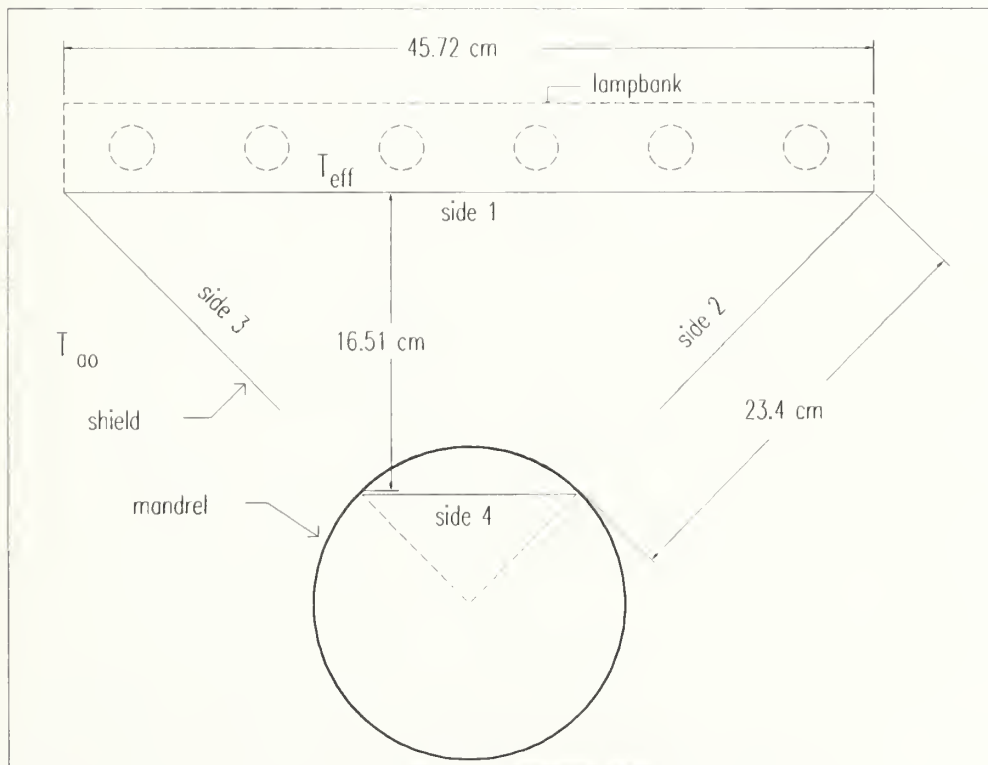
Lamp Bank, Shields, and Mandrel Assembly
